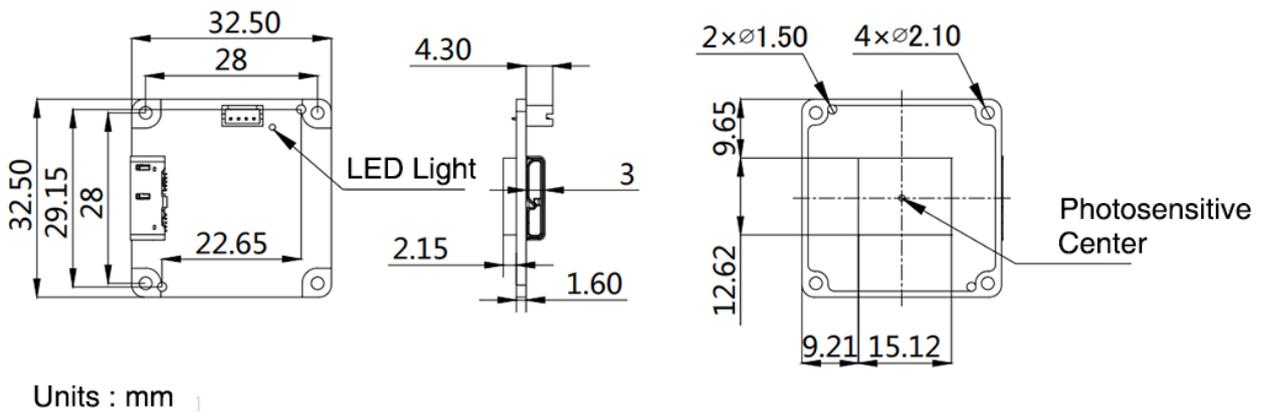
VEN-830-22U3M/C-M06 mechanical dimensions
